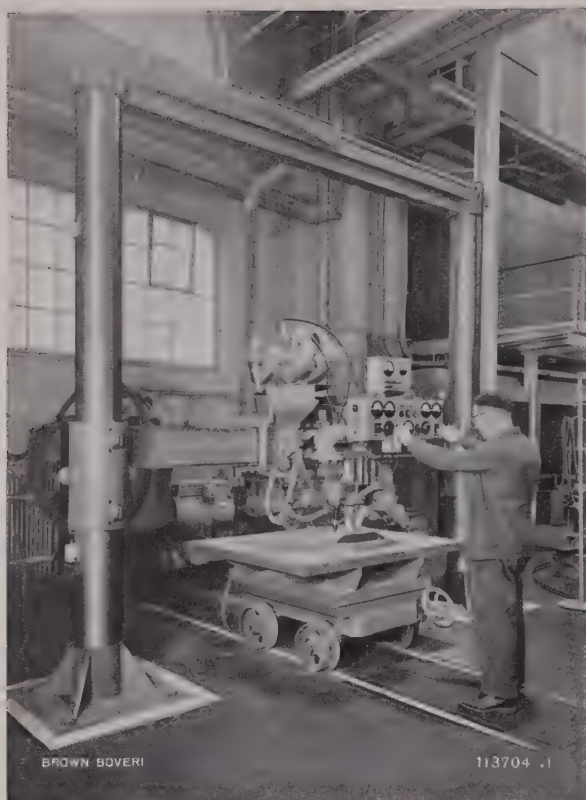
Laboratory welding installation at Sulzer Bros., Winterthur
